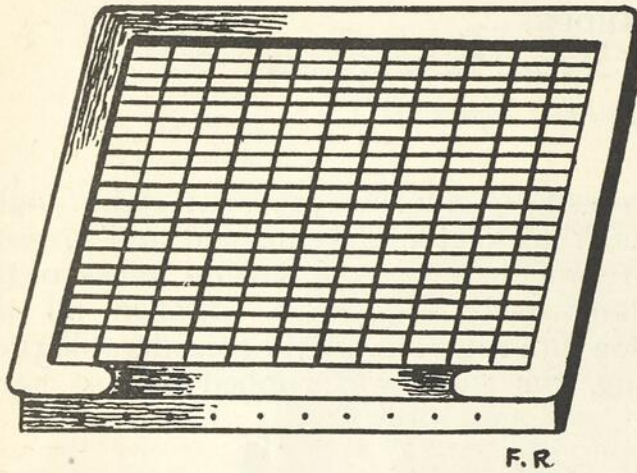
Hand Mould for Making Paper. Sketched from an Old Print.
